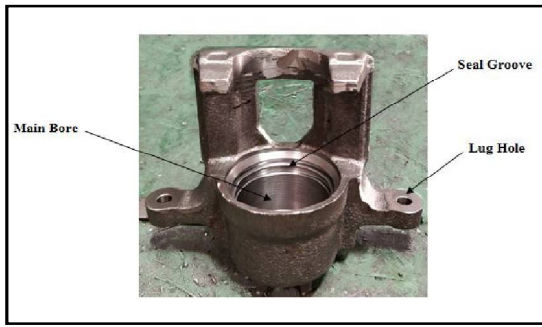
Actual Y9T Caliper machined in MCV 650 – F48 with Parameters
